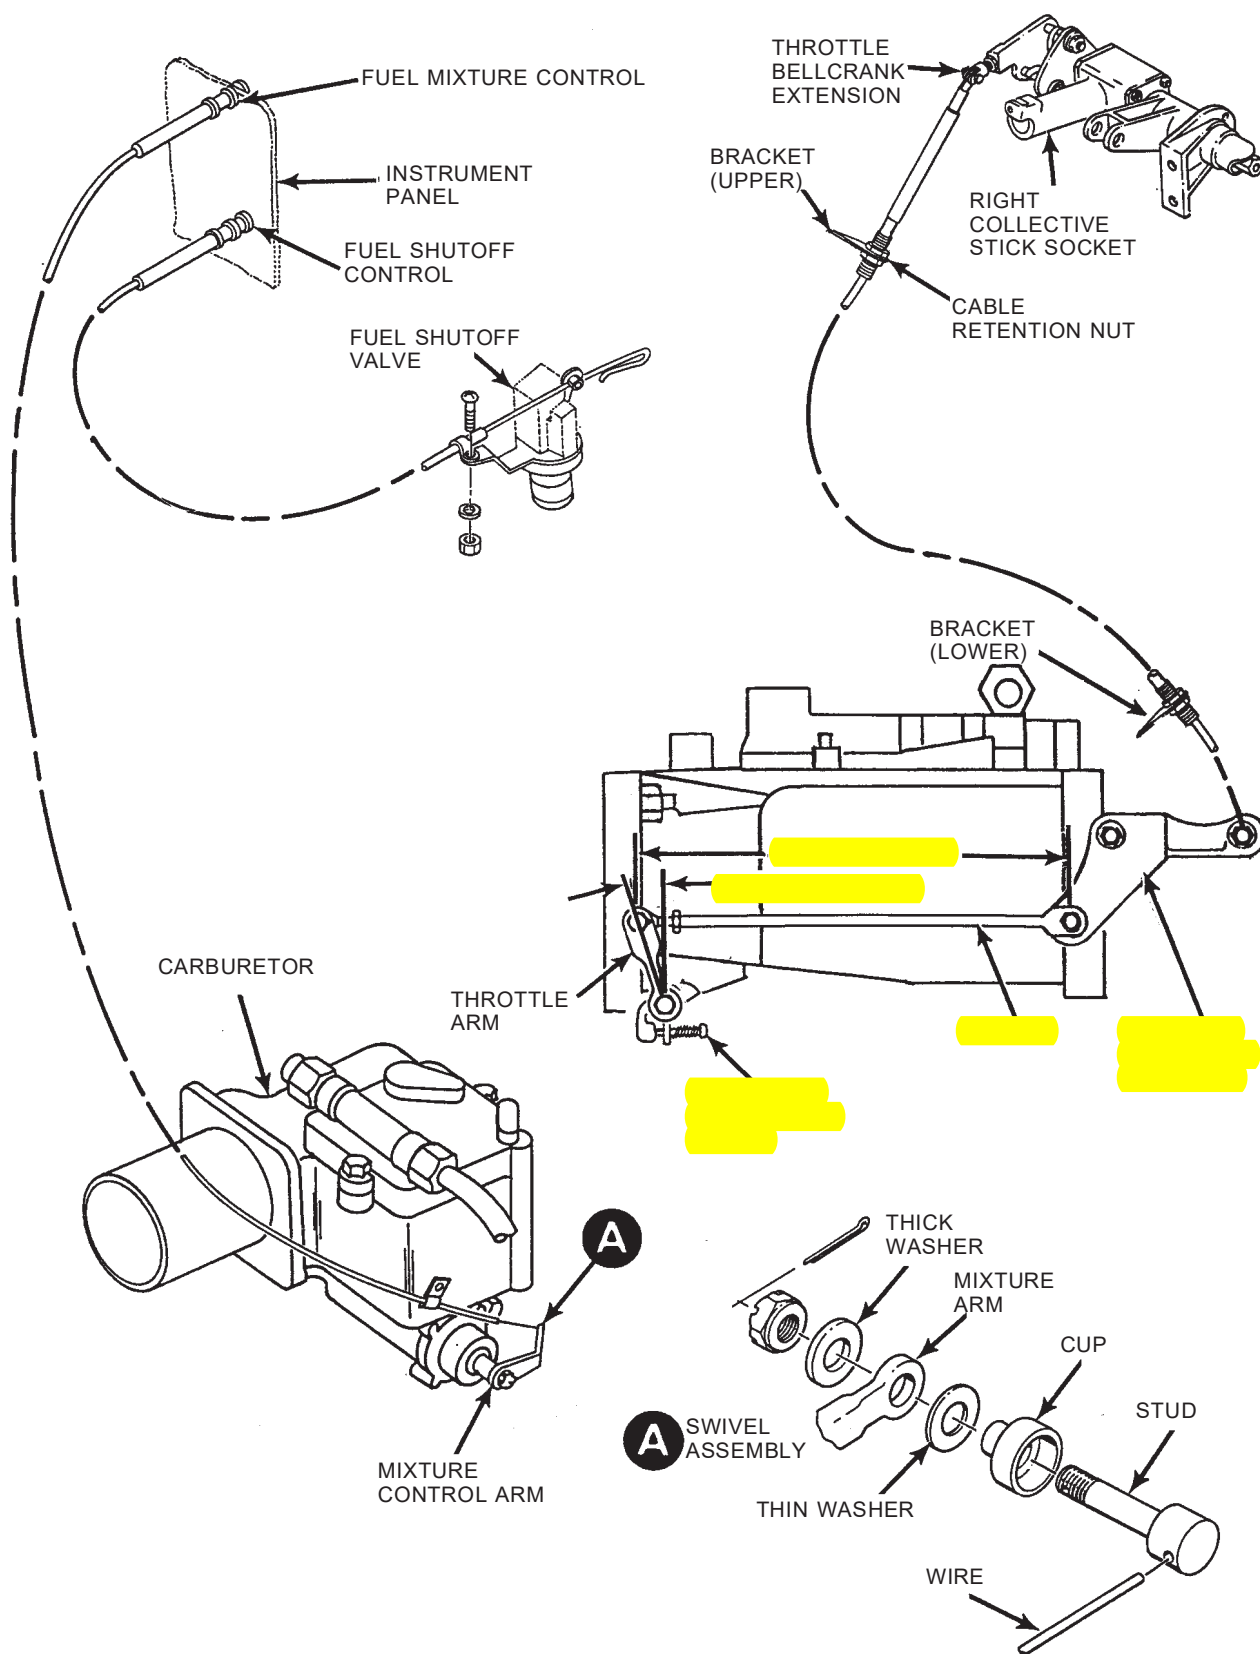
Engine Controls (Carburetor Engine) (Sheet 1 of 2)
